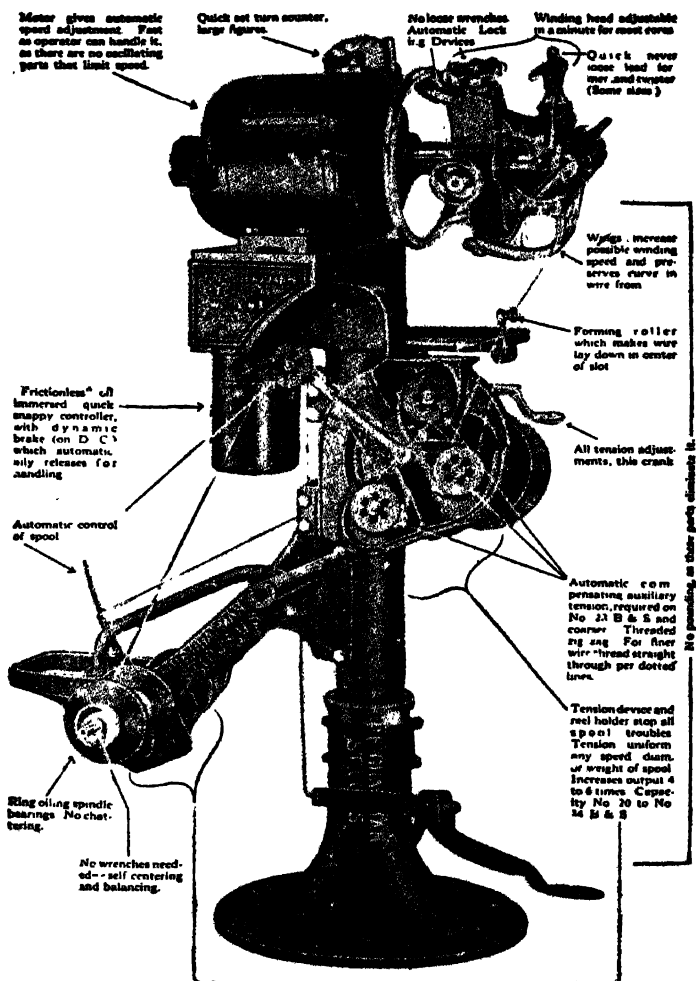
Chapman style 3 adjustable bipolar drum armature winding machine.
